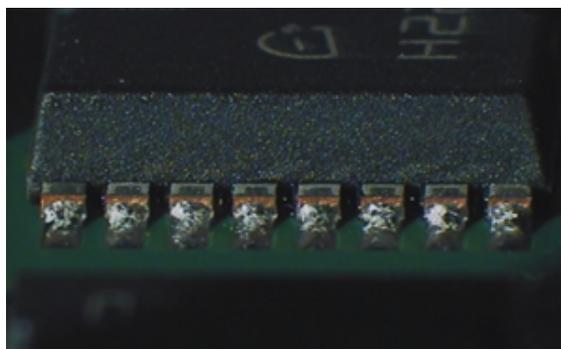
Image of the leads of a TO-Leadless device soldered to a PCB
